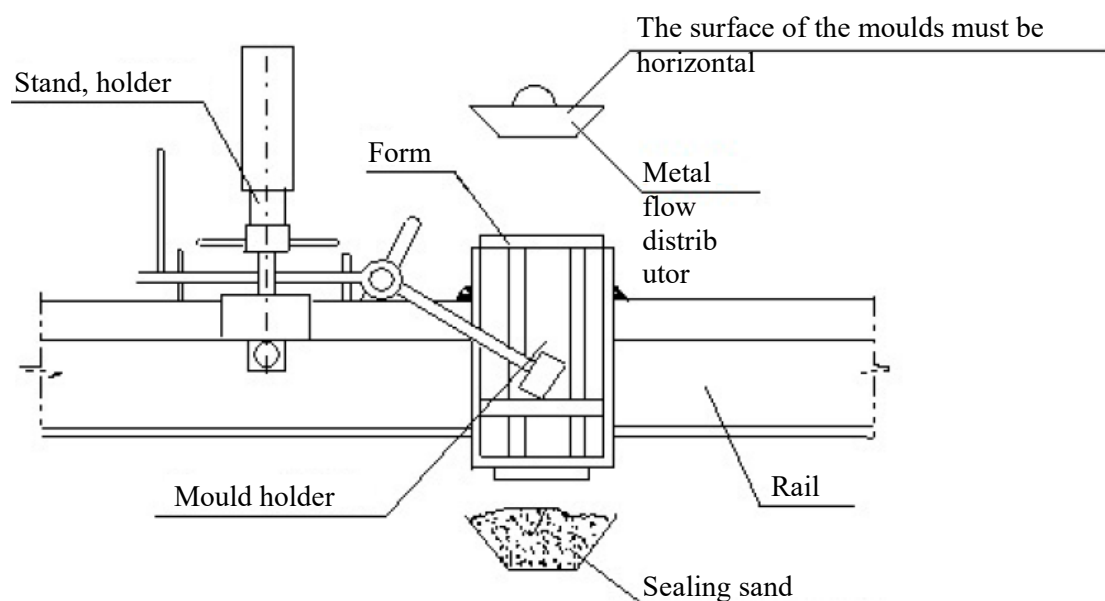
Scheme of the installation and sealing of ceramic moulds at the welding site
